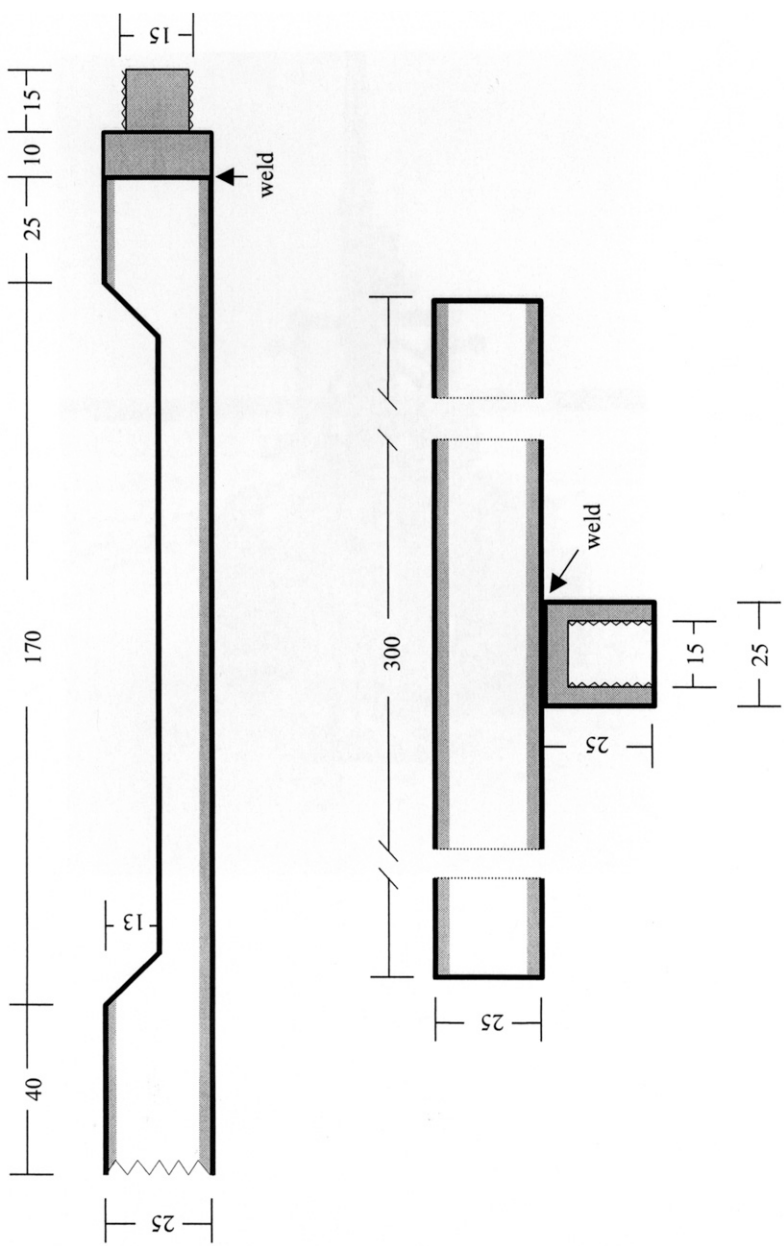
The modified Hoffer probe. The diagram depicts the coring bit with serrated edge and T-handle (dimensions in mm).
